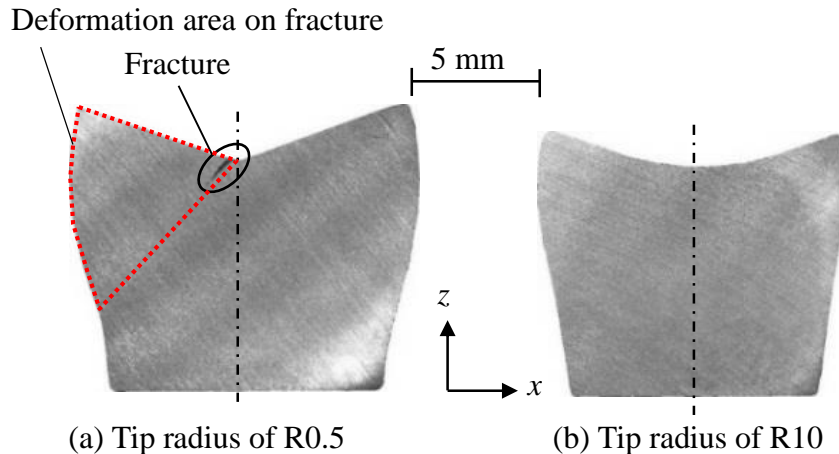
Cross sectional view of billet after upsetting using 140°- wedged upper die
